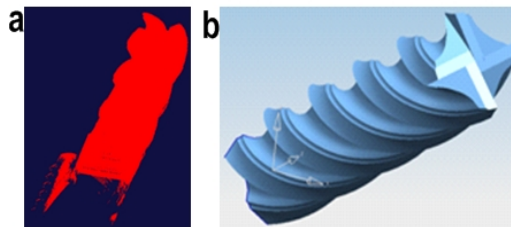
Reverse modeling of cutting tool. (a) Tool point clouds; (b) Tool geometric model.
